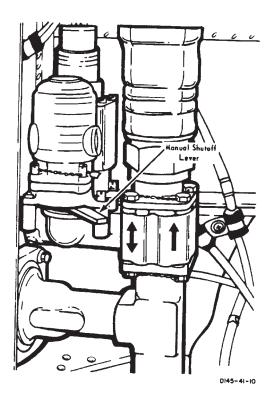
Engine Fuel Valves, Sta. 498
